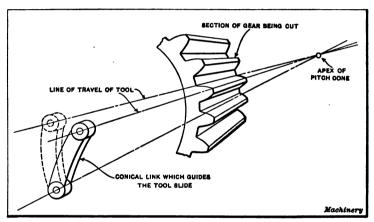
The Odontographic Principle for Forming the Teeth of Bevel Gears
